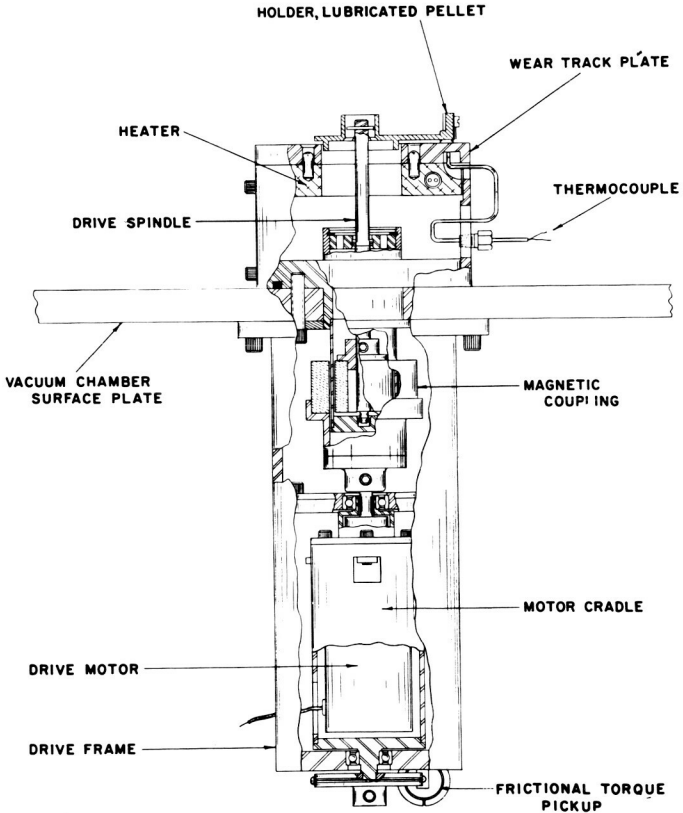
MRI vacuum friction apparatus drive assembly.
